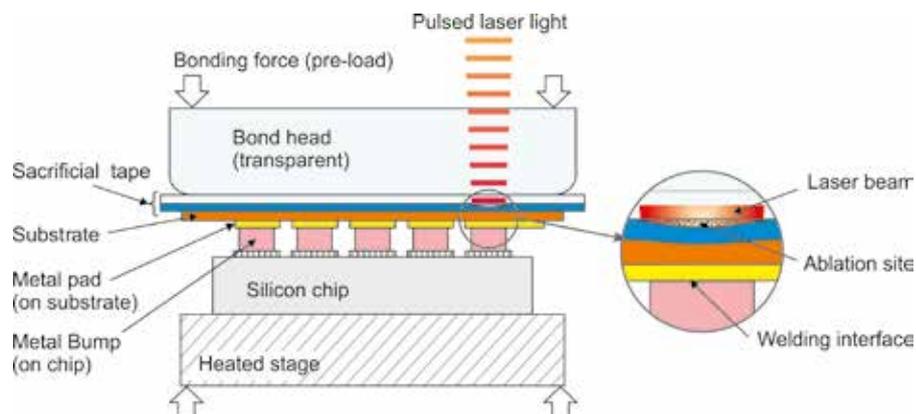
Laser-thermosonic micro-welding process as applied to flip chip assembly.
